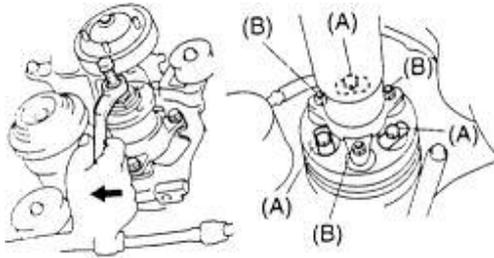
Rotate the shaft and remove ONLY bolts A and washers
